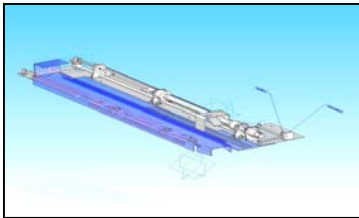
Isometric of screw racking assembly that is installed into each circuit breaker cell.
